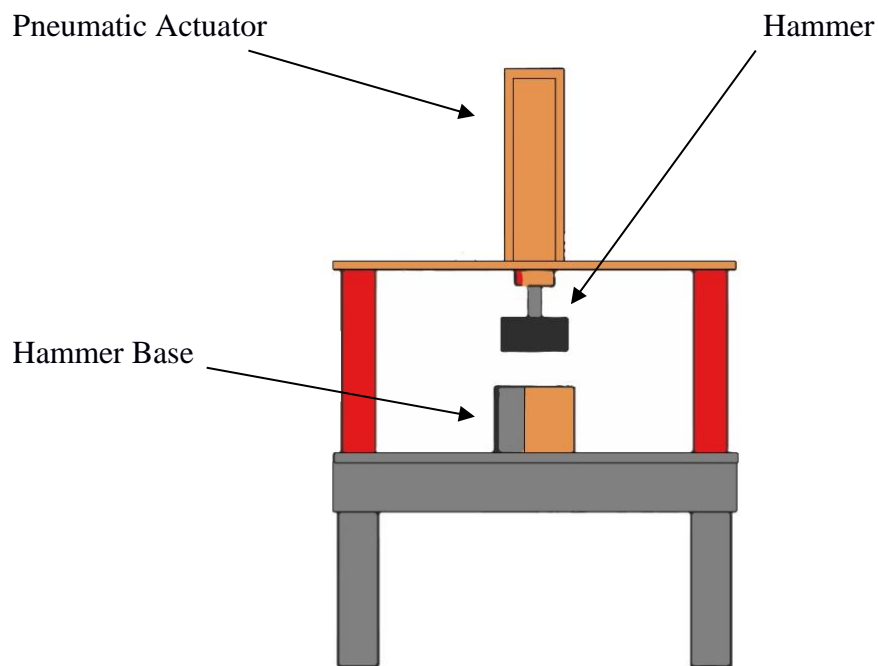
Automatic Pneumatic Hammer Machine.
